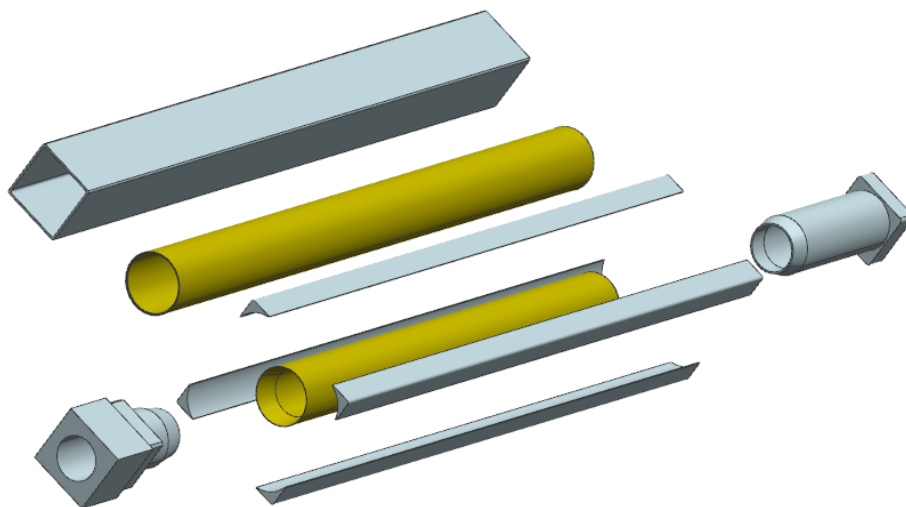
Exploded view with marked parts (yellow colour), which will be solved
